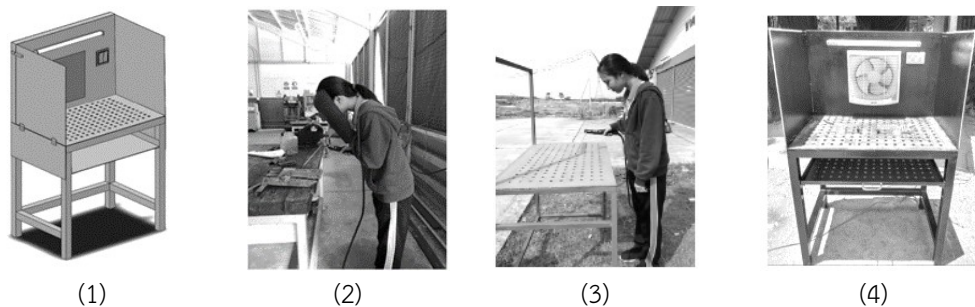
(1) Welding table, which is a 3D model (2) The user stands and welds on the old welding table (3) The user simulates a standing welding position on a prototype (4) Prototype
